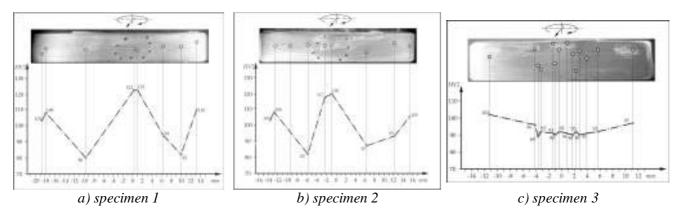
Hardness of the FSW weld, thermomechanically and heat affected zone, and parent material
